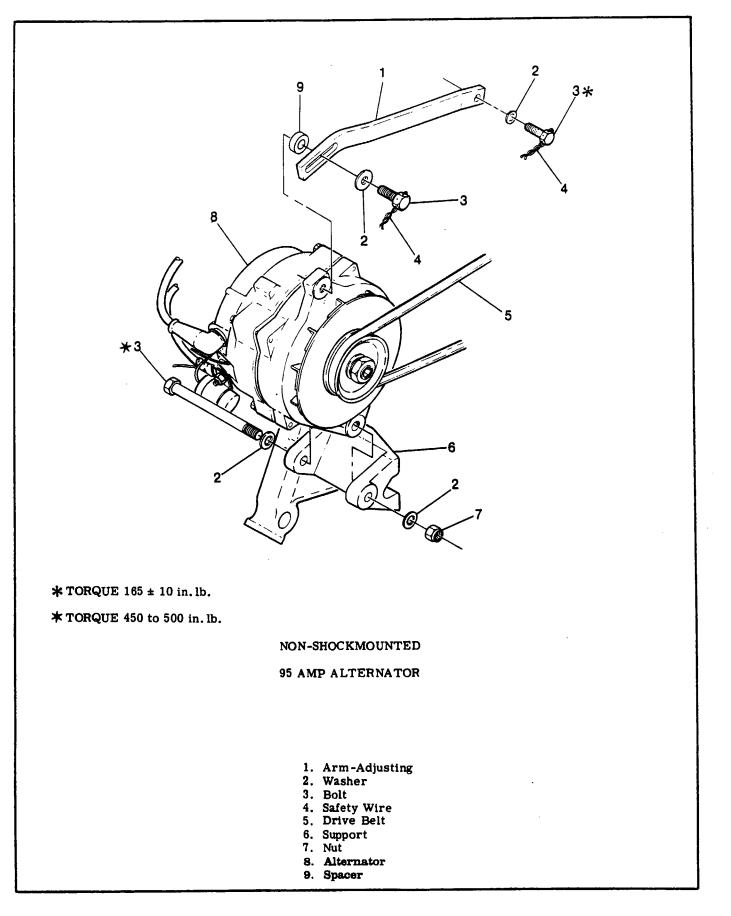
Alternator Installation (Sheet 2 of 2)
